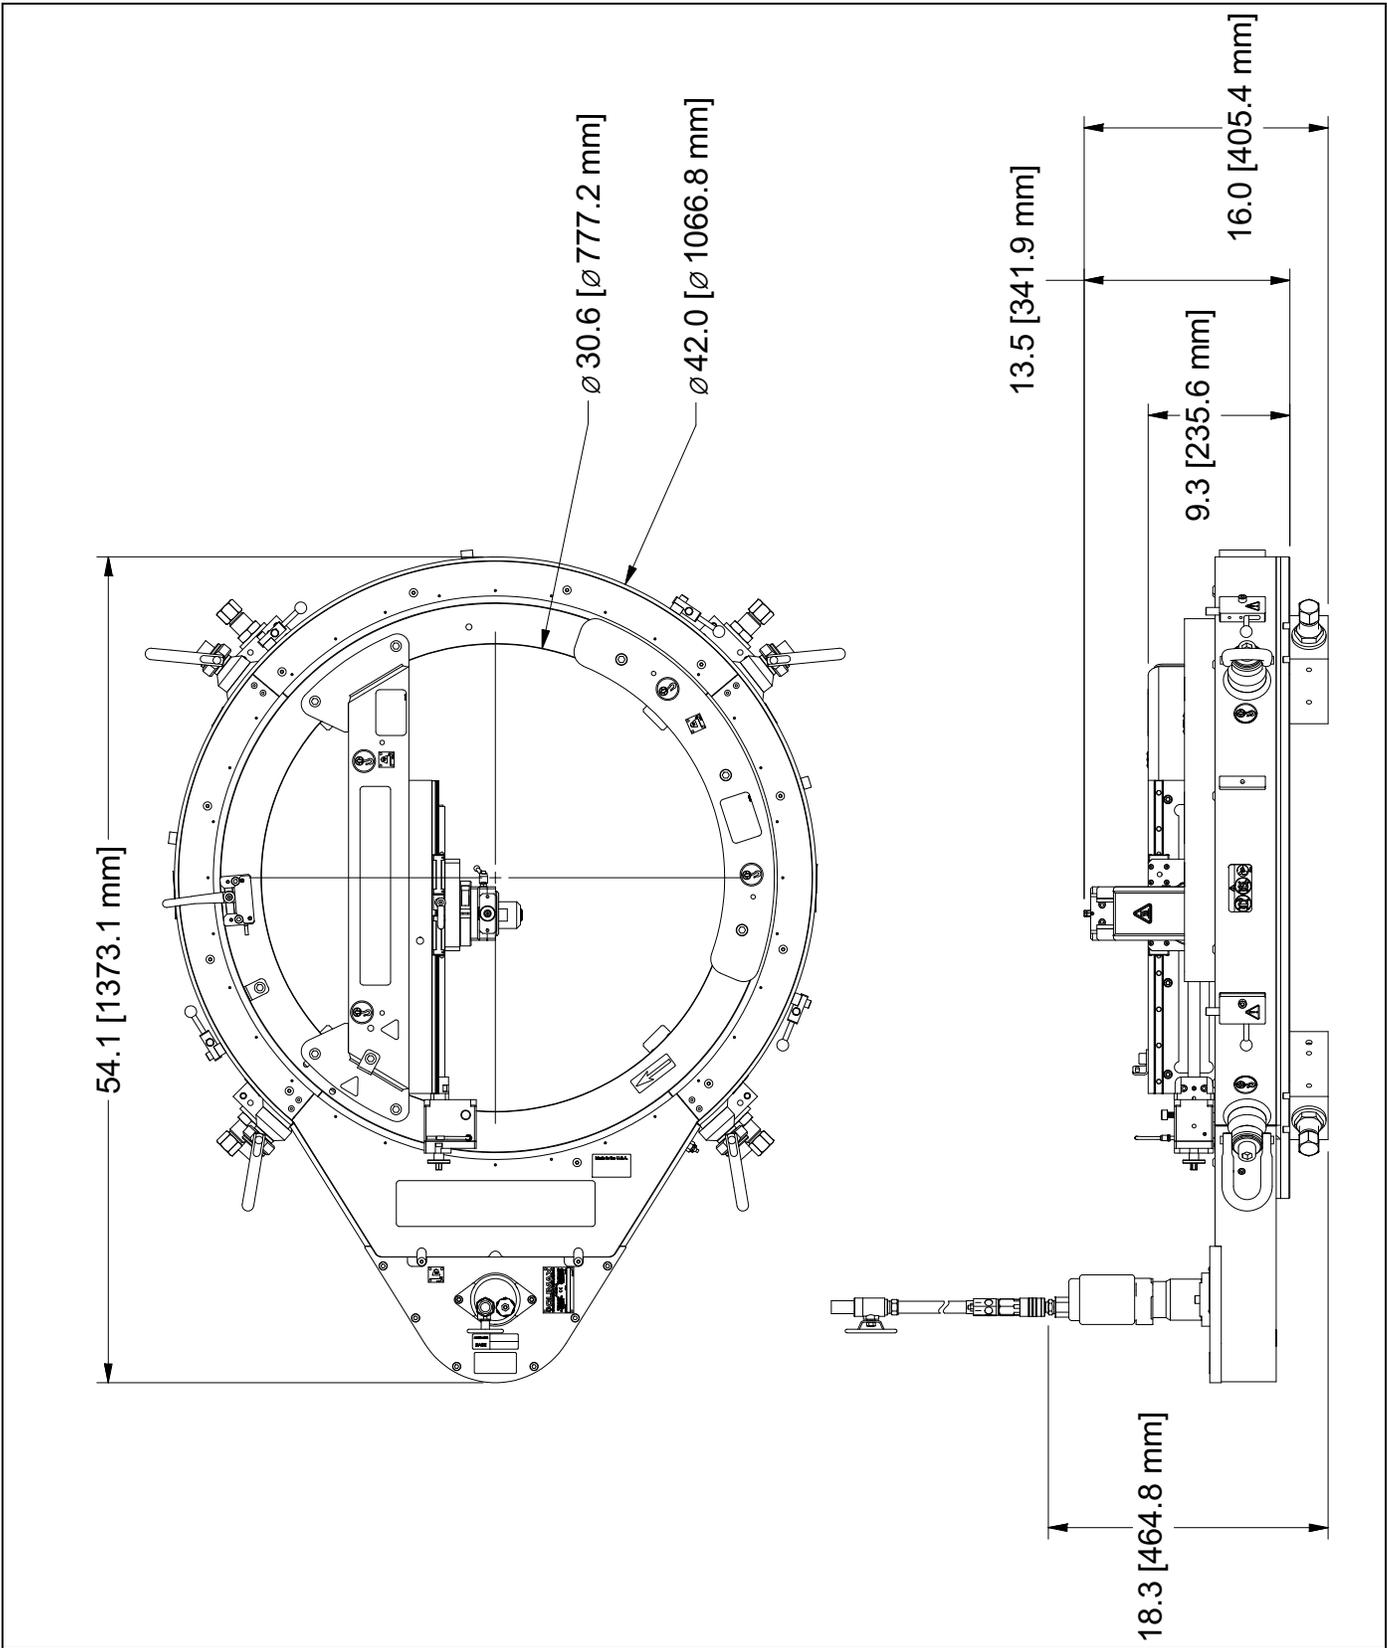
ODF30 SPEED FACER DIMENSIONS (RÉF. 88930)
